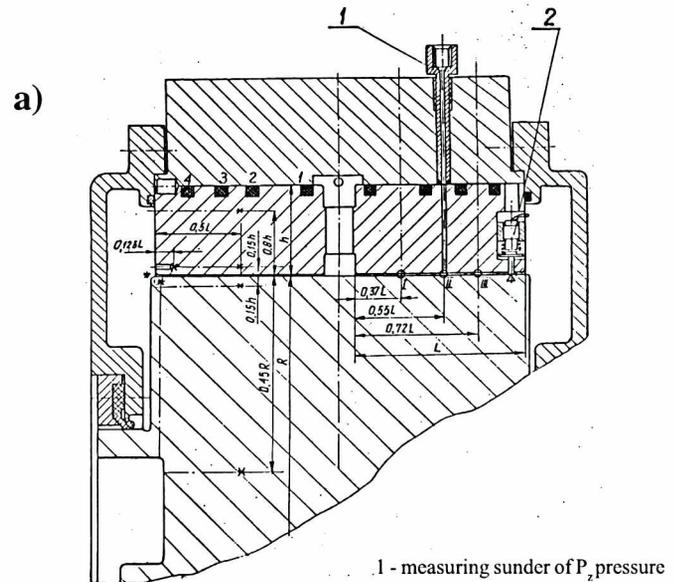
Axial cross-section through the investigated seal with the sleeve a
